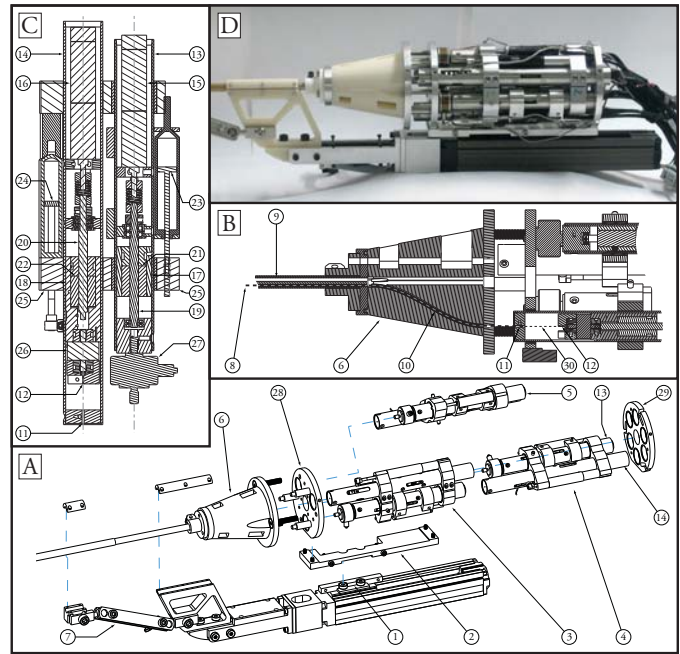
Actuation unit for the telerobotic slave. (A) Exploded view with subassemblies marked. (B) path of concentric nitinol backbones guided from the distal manipulator to the backbone actuation assembly. (C) Cross section of the backbone actuation assembly. (D) Photograph of the actuation unit with cover removed. Further details in text.
